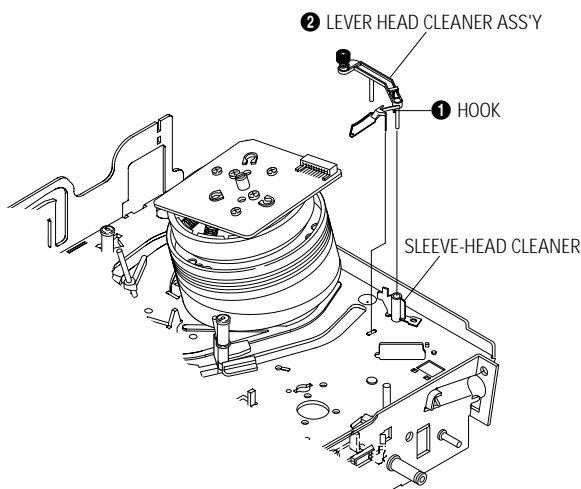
Lever Head Cleaner Ass'y Removal
